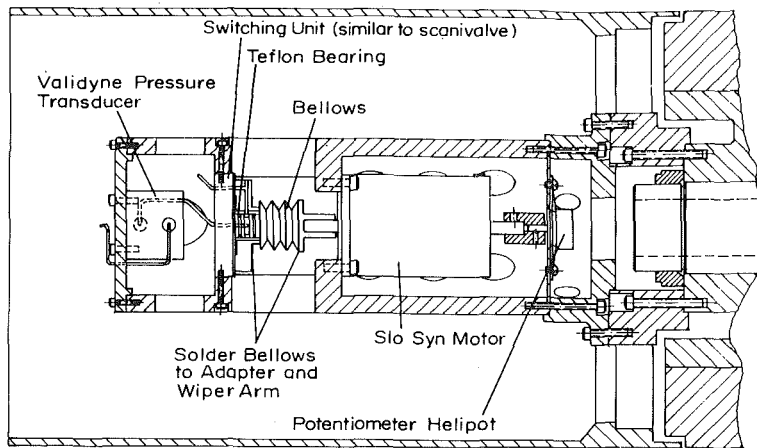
Pressure transfer device-scanivalve-rotating transducer assembly at The Pennsylvania State University [53, 54]
